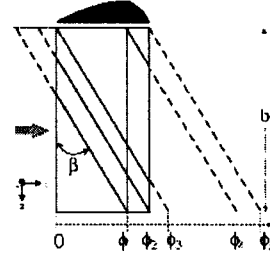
Cutting edge positions relative to rotation angle of tool in up-end milling.
